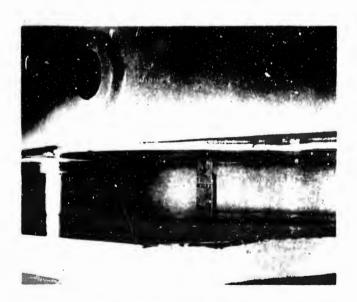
Test Set-up of Type III Coupon in SR-4 Universal Testing Machine
